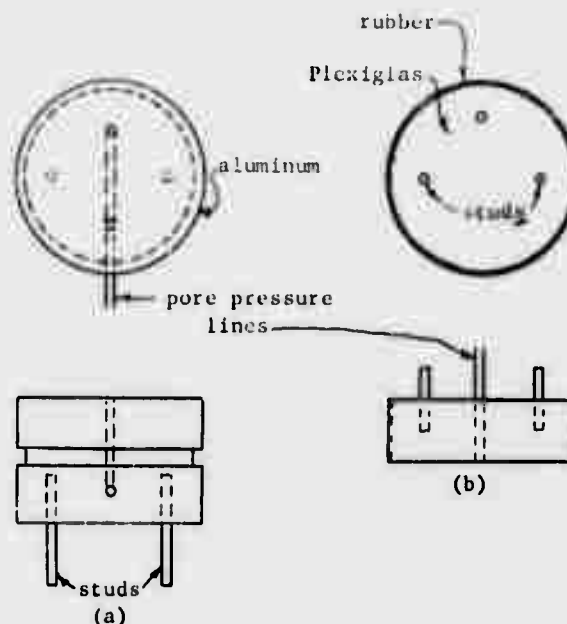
End pieces used with specimens (a) bottom cap (b) top cap.
